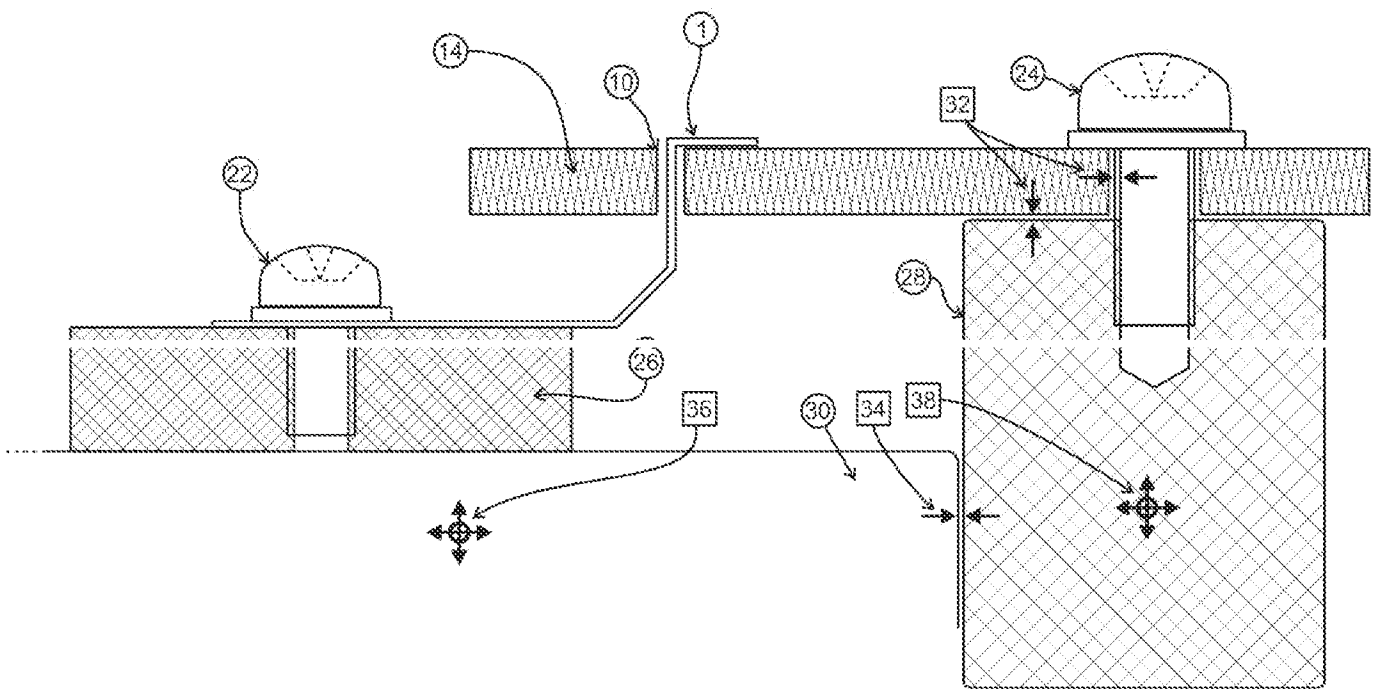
TYPICAL MOUNTING ARRANGEMENT
